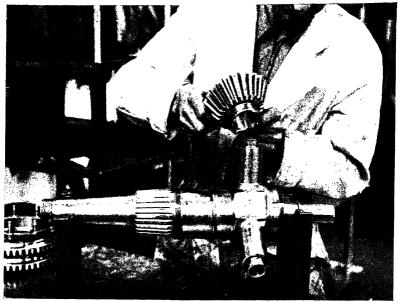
Assembling pinions and busies to airscrew shaft stub arms.
